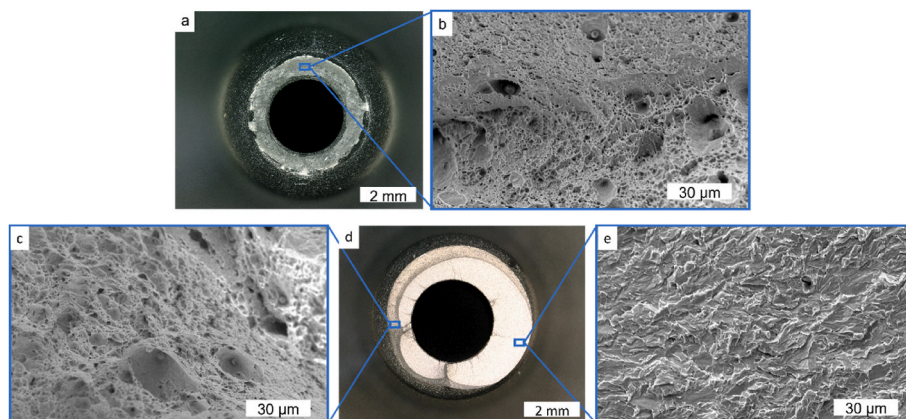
Fractographic analysis of fractured tensile specimen a), b) specimen tested in 60 bar Argon c), d), e) specimen tested in 60 bar hydrogen.
